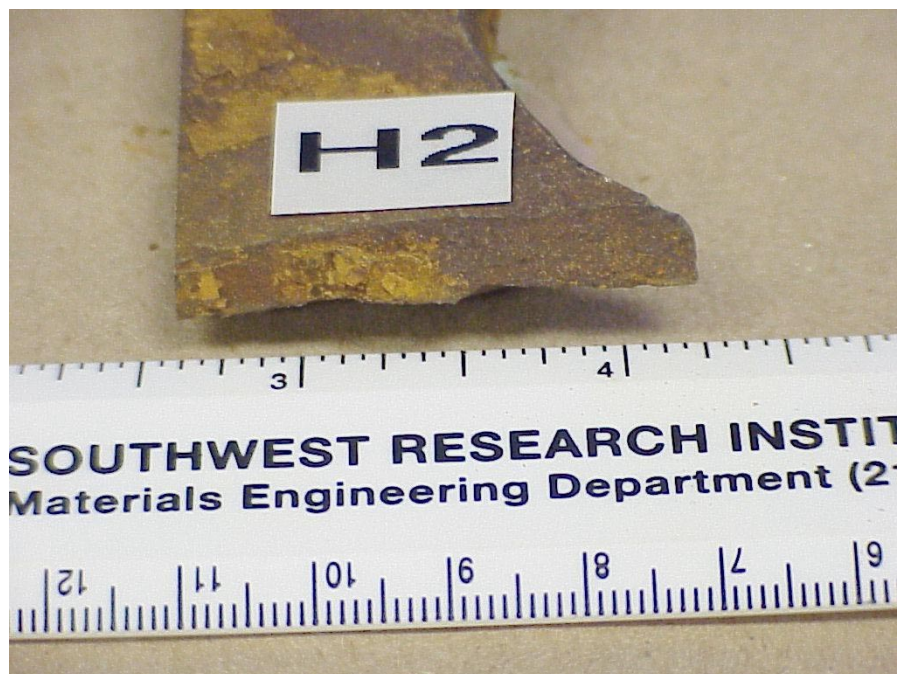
Fracture surface of Sample H2 prior to cathodic cleaning.
